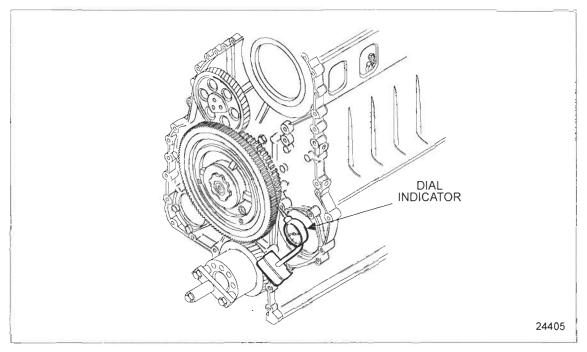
Crankshaft Timing Gear-to-Bull Gear Lash Measurement
